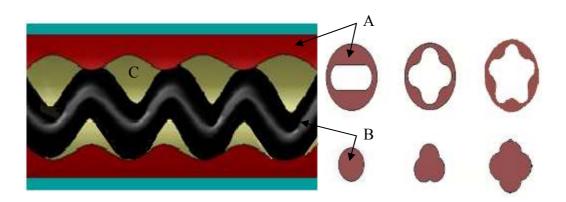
Schematic of rotor and stator: A- stator; B-rotor; C-hole
